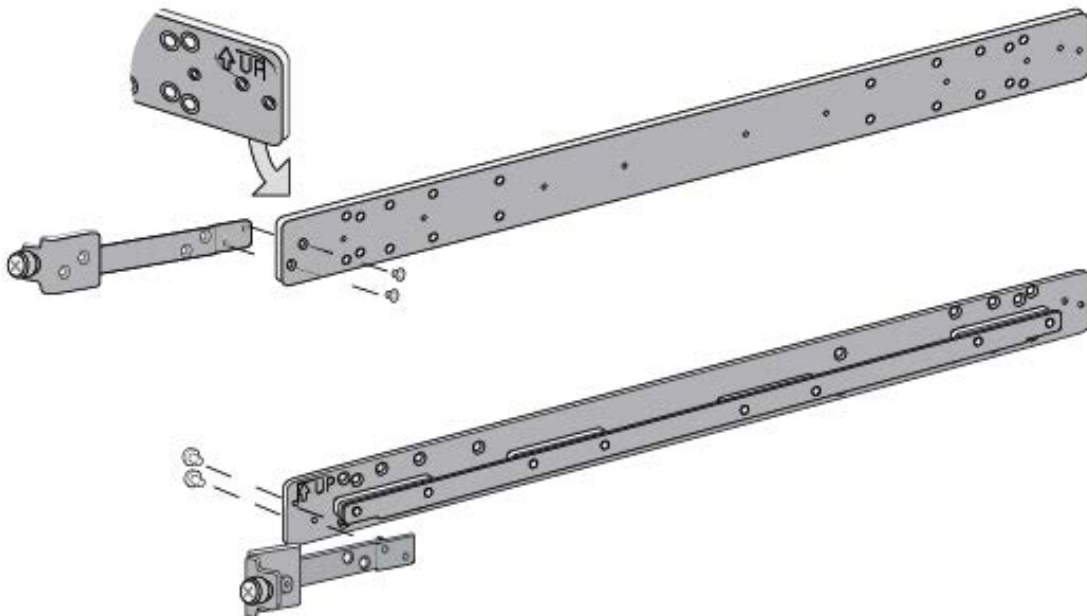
Example of Attaching the Extension Brackets to the Inner Rails
